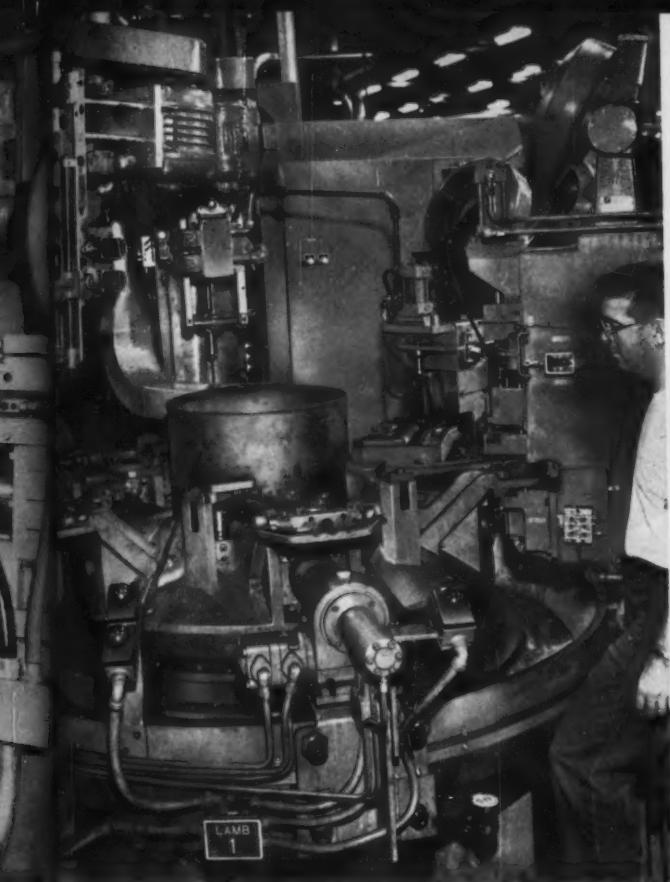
Drilling, reaming, and pressing of bushings and pins into exhaust manifolds are performed on this six-station dial machine.
